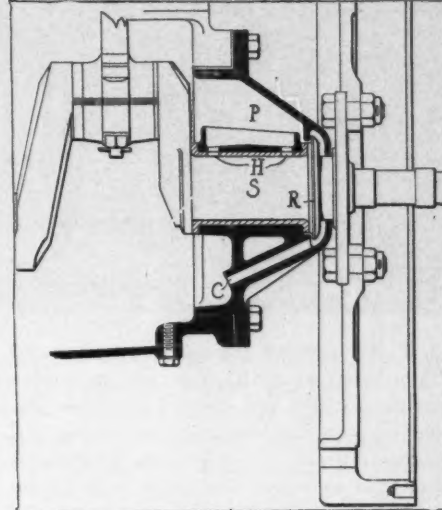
REAR BEARING THOMAS CRANKSHAFT
